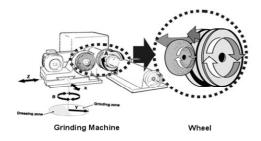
Grinding Principle of Granlund five-axis CNC Grinder
